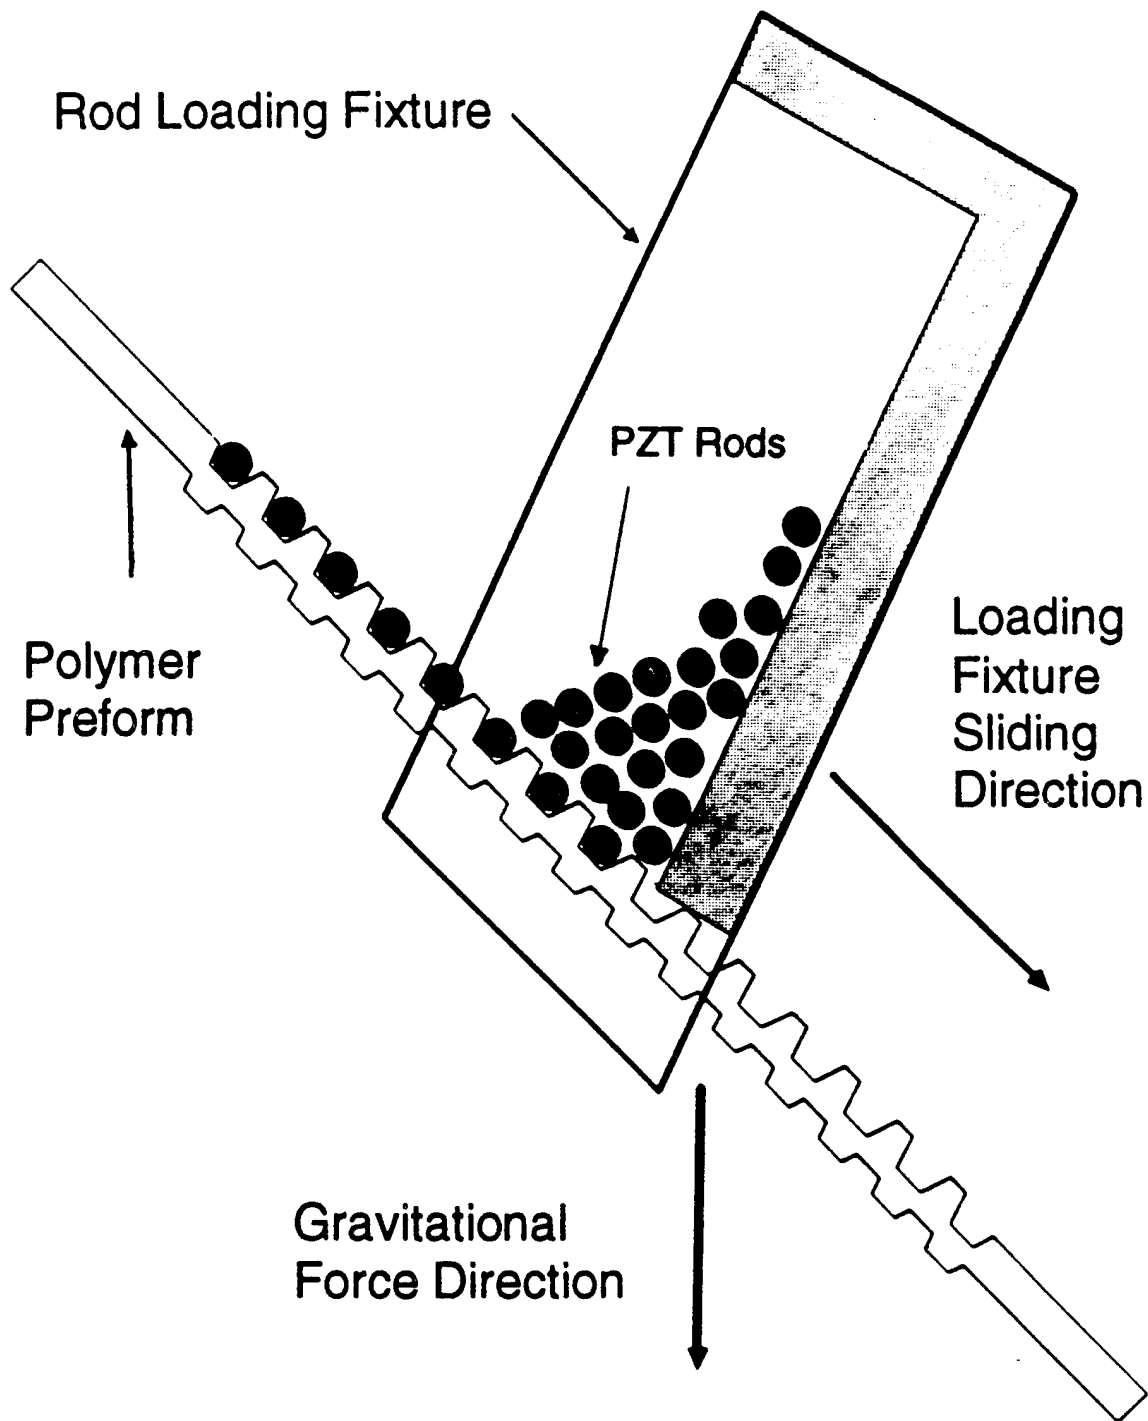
Schematic of rod assembly fixture showing the loading mechanism
